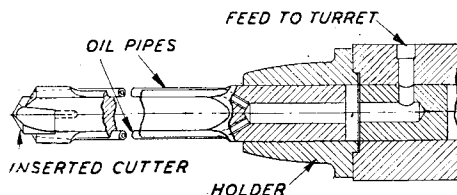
Special drill, with inserted cutters and oil passages, for heavy drilling on capstan and turret lathes. (Messrs. H. W. Ward and Co. Ltd.)
